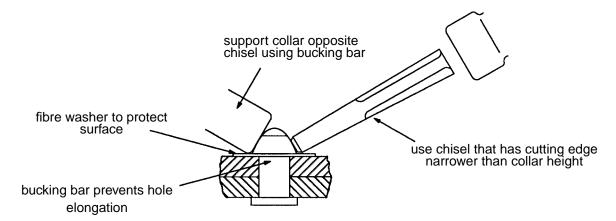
Chisel Method Removal of Installed Hi-Shear Fasteners
